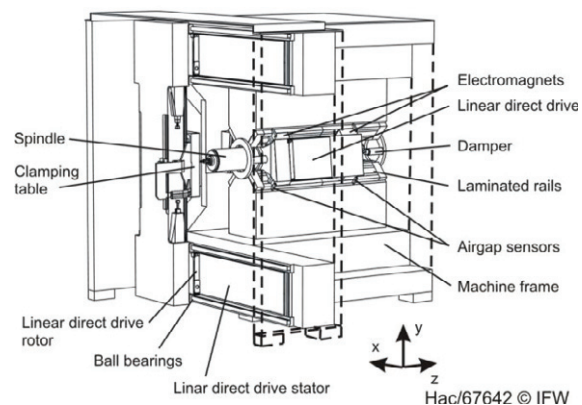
Machine tool prototype ‘Schnelle Maschine’
